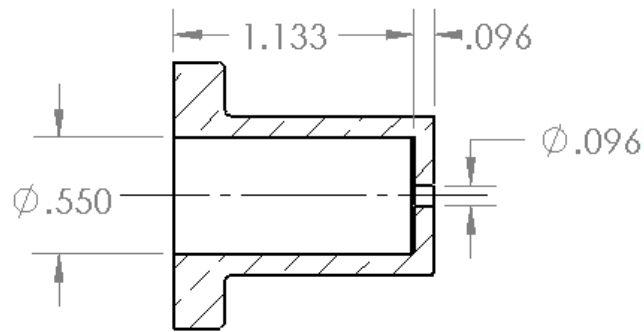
Schematic of the '1S' nozzle (all dimensions are in inch)
